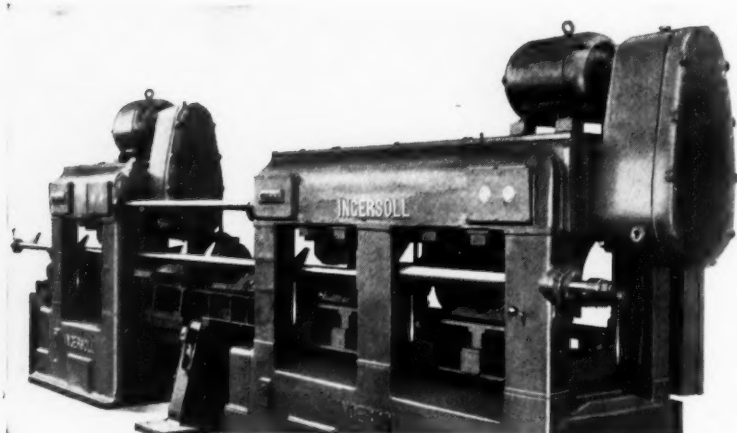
Boring the Cam and Crank Holes of V-type Automobile Cylinder Blocks in an Ingersoll Boring Machine
